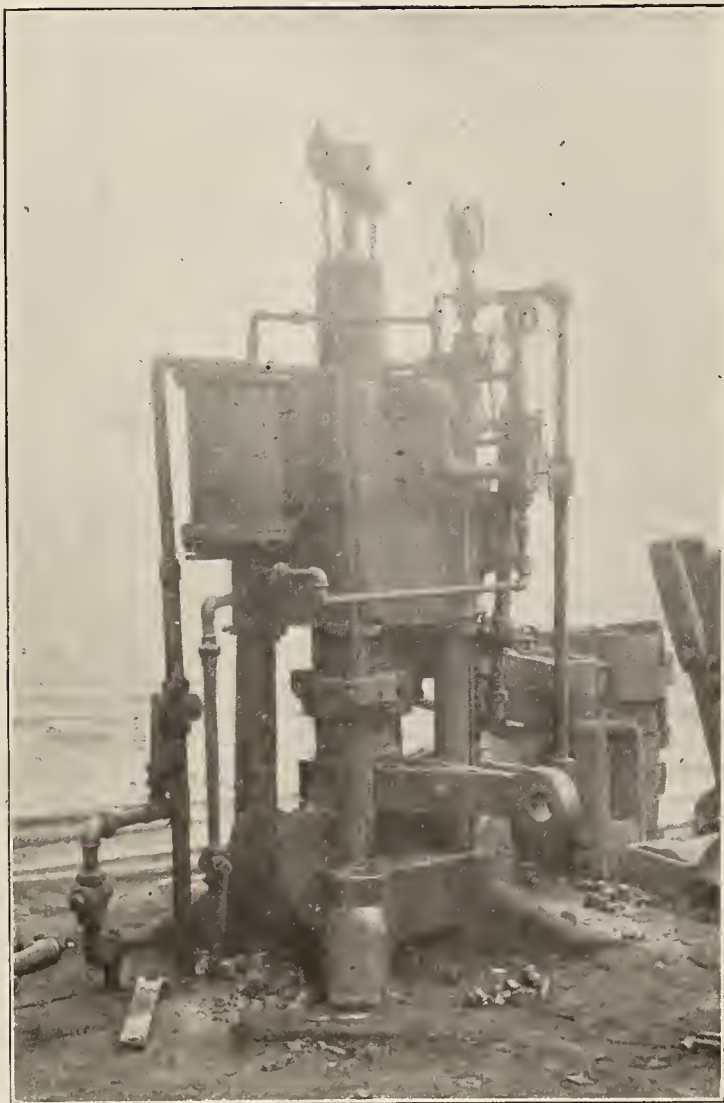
FORGING AND COUPLER POCKET MACHINE.
